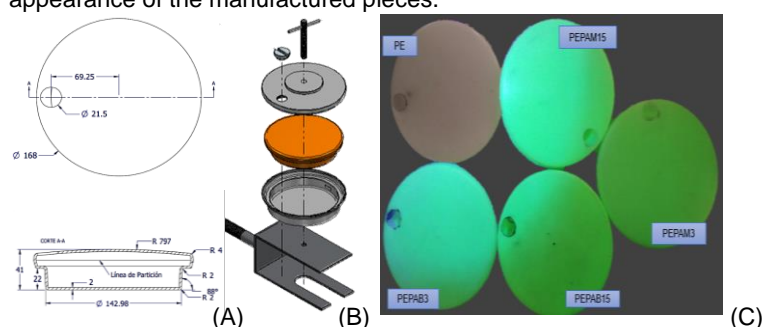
Prototype piece and roto-molding mold. (A) Plan of the prototype piece. (B) Scheme of the designed mold. (C) Prototype piece manufactured by rotational molding.
